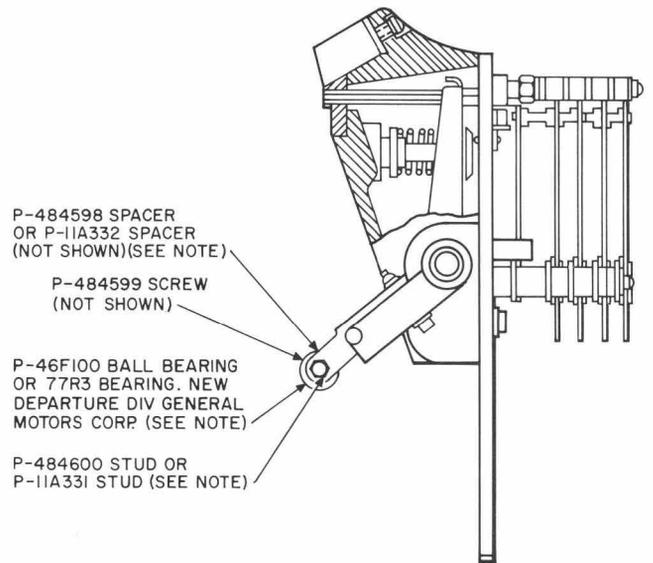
KS-13835 L5, L6, and L7 Readers—Control Contact Assembly—Contact Spring Assemblies and Associated Parts—L Contacts
